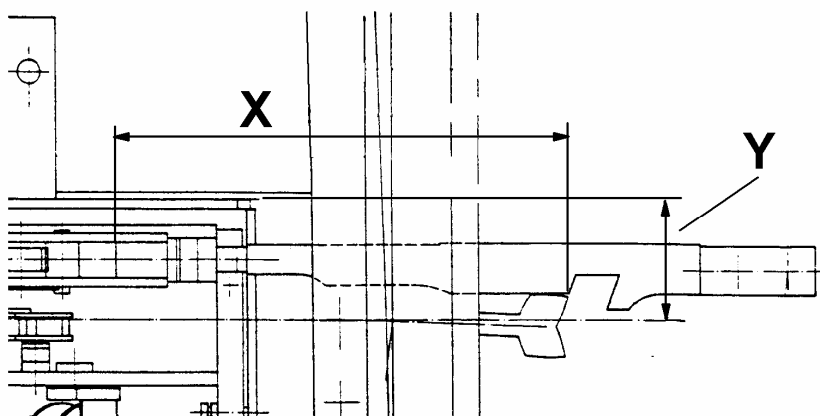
, HWU 160 K-D, Reference dimensions for installing the earth case and parts of the clamp locking device
